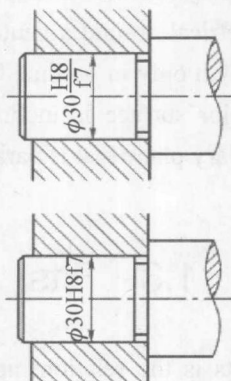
A typical example of the dimensioning of fit code in the assembly drawing
